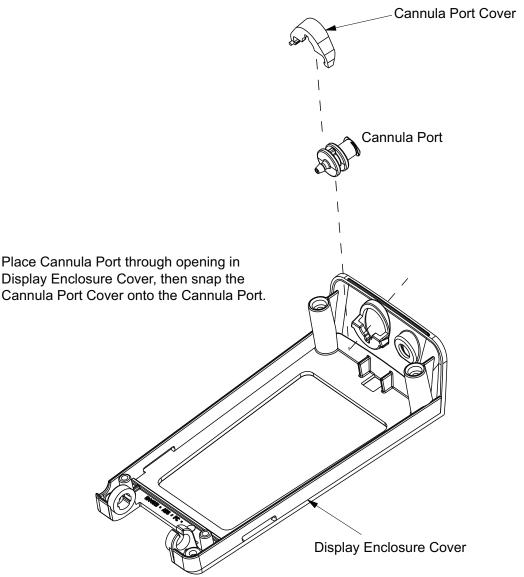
FIGURE M: CANNULA PORT REMOVAL/INSTALL
